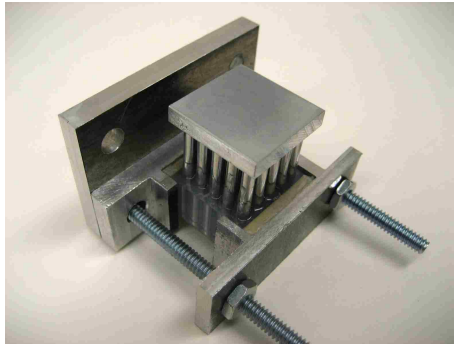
Picture of inclusion specimen being set-up in aluminum cutting frame
